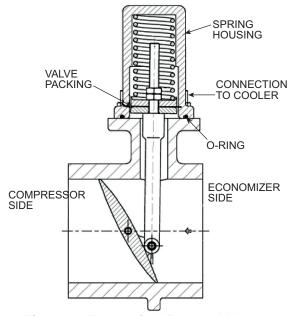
Economizer Damper Valve (Two-Stage Compressor Chiller)
